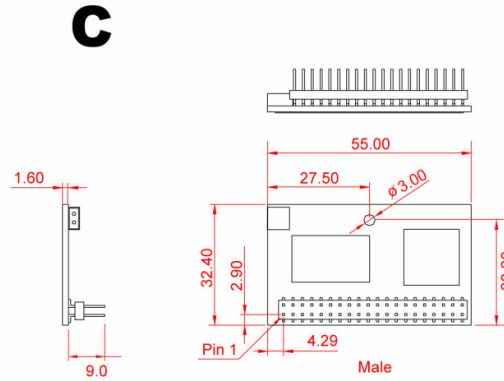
Mechanical Dimension of EDC4000 40-pin(Horizontal Male Type D)
